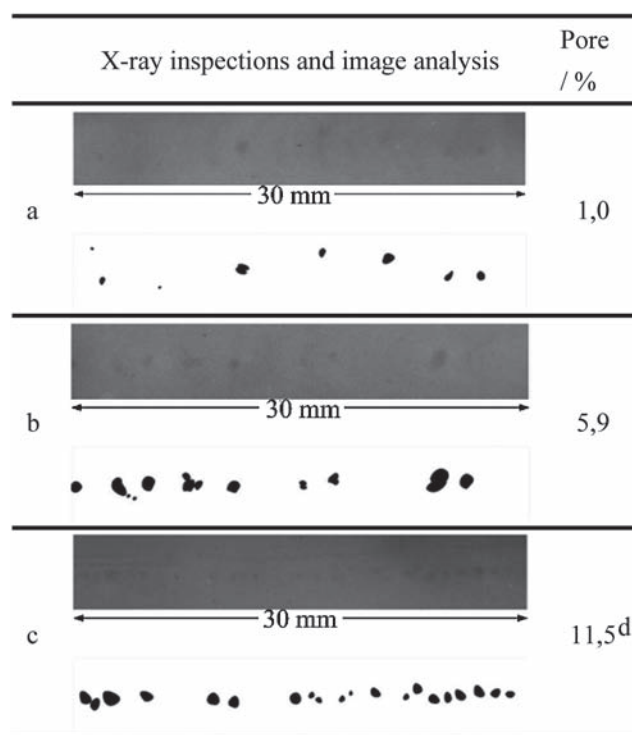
X-ray inspections and porosity content of weld bead in various welding speed (a - 1 m / min, 3,5 kW; b - 2 m / min, 3,5 kW; c - 3 m / min, 3,5 kW)
